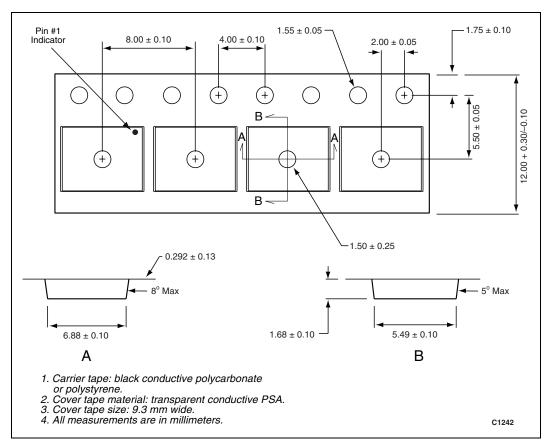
CX65003 8-Pin SOIC Tape and Reel Dimensions
